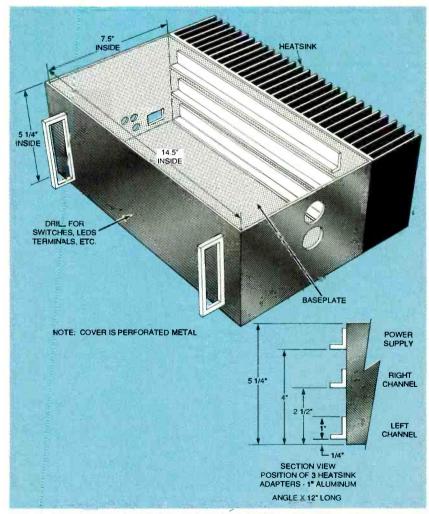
INSIDE CASE DIMENSIONS FOR THE HOME AMPLIFIER. These minimum inside dimensions are given for a case to be made by you or purchased. The locations for mounting the three aluminum heatsink adapters are also given.
